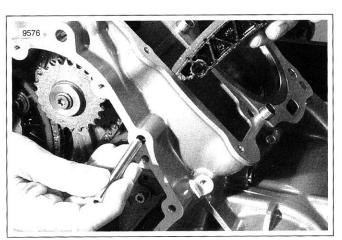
Rear Cylinder Cam Chain Tensioner
